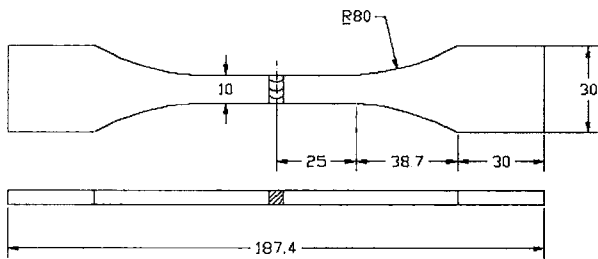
Transverse specimen for fatigue test (Thickness = 2mm)
